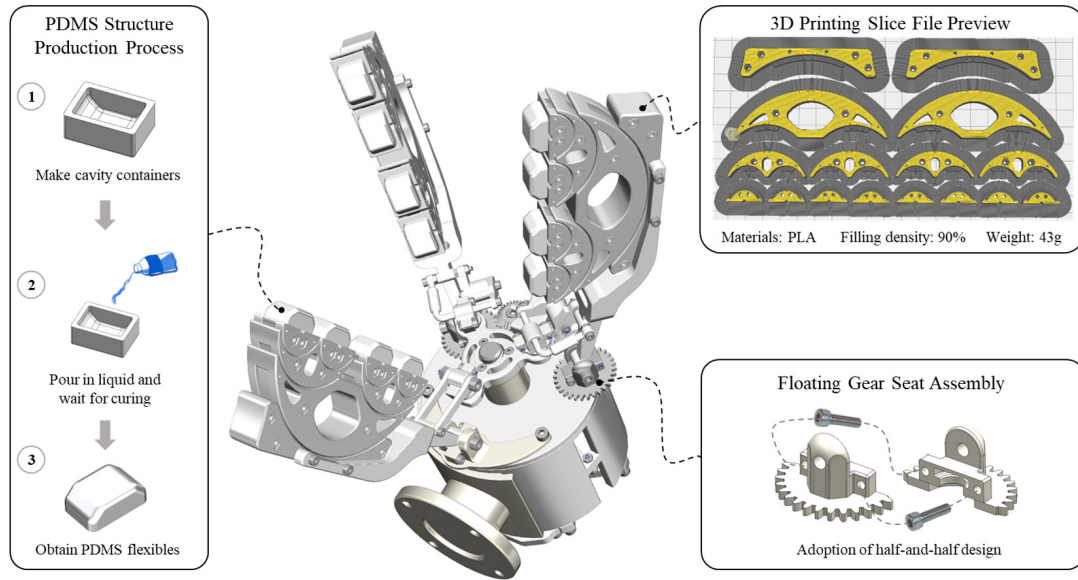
Partial details regarding the fabrication and assembly of the fractal gripper are presented.
